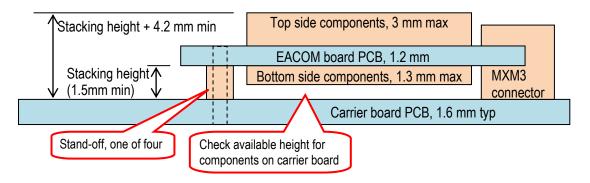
COM Board Mounting in MXM3 Connector, Stacking Height
